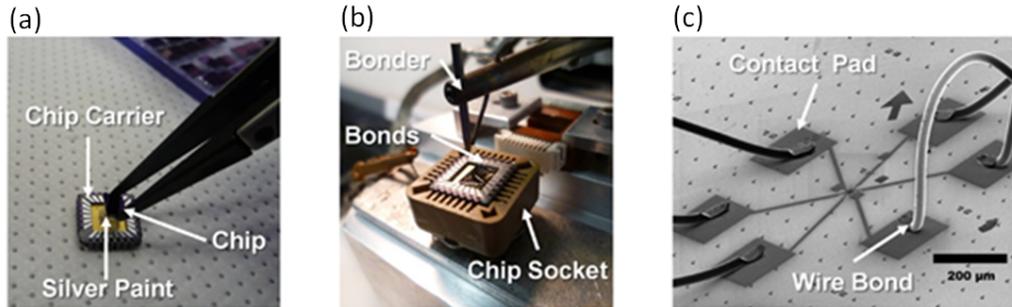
Images showing the wirebonding steps completing the fab process. (a) The chip is held in place on the chip carrier using silver paint. The gold surface of the carrier is now electrically connected to the gate electrode. (b) Aluminum wires are used to connect the carrier pins to the large contact pads. These wires are installed using a wirebonder. (c) Tilted SEM image showing the wirebonds and the device layout. Image from Champagne Group archives [54].
